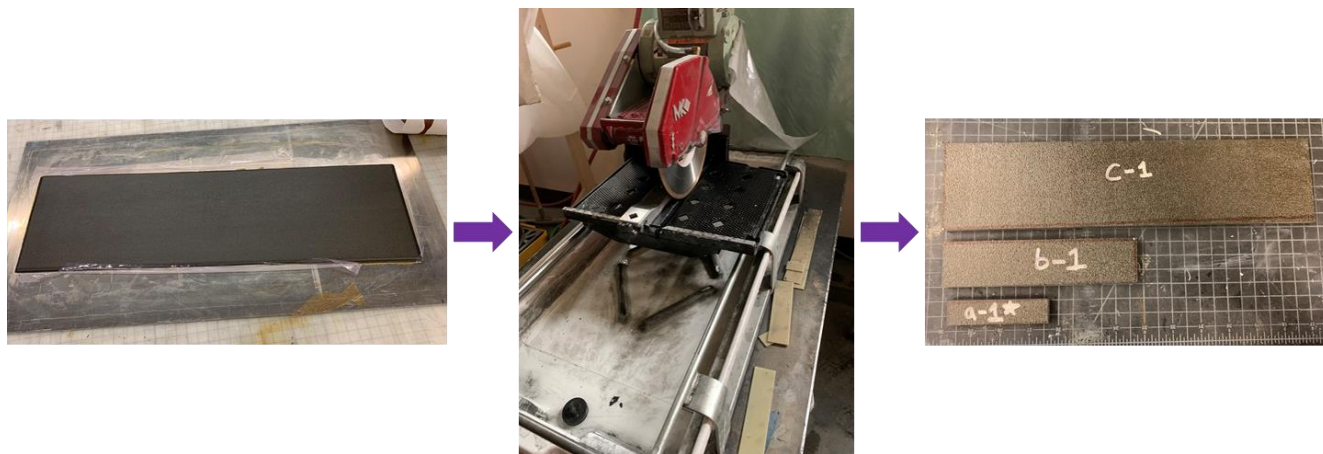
Master panel being cut with a wet tile saw to the desired test specimen dimensions.
